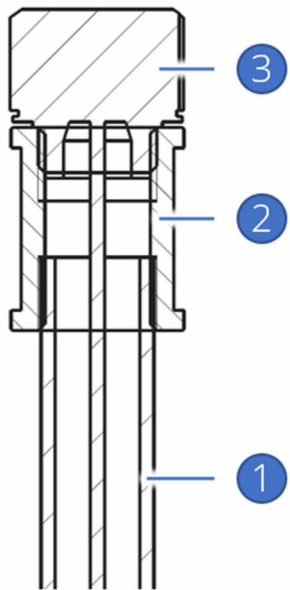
mechanical oil dipstick – installation angle 25,6° to 26,9°
